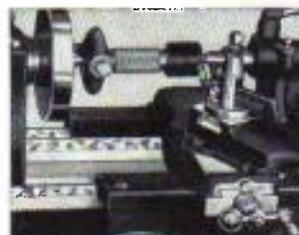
Application of the Adjustable Thread Cutting Stop.
